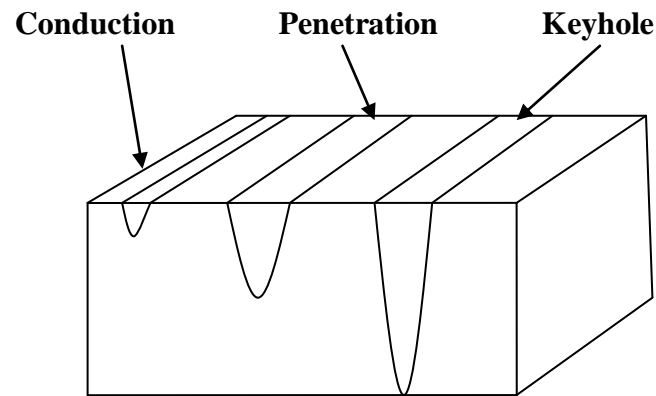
shows schematic representation of conduction, penetration and keyhole welding
